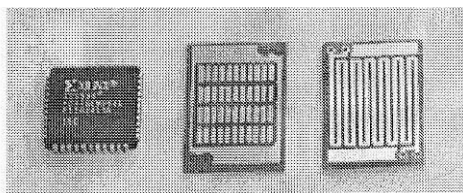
Test piece of a printed wiring board with built-in soldering heater.
